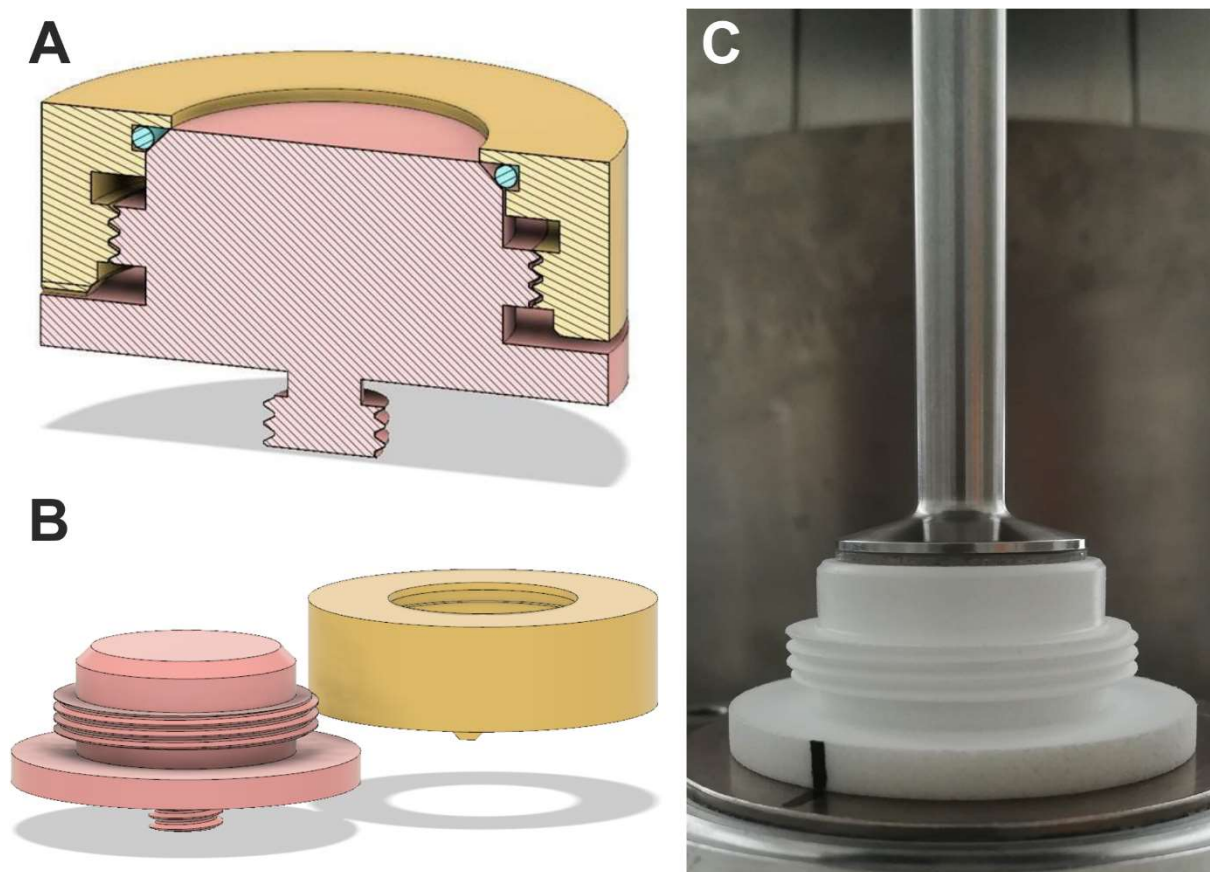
Schematic representation of the 3D printed bottom plate geometry (red) with outer ring (yellow) and O-ring sealing (magenta) (A) combined and (B) separated. (C) Bottom plate with loaded sample and engaged rough plate to ensure minimal mechanical input before measurements
